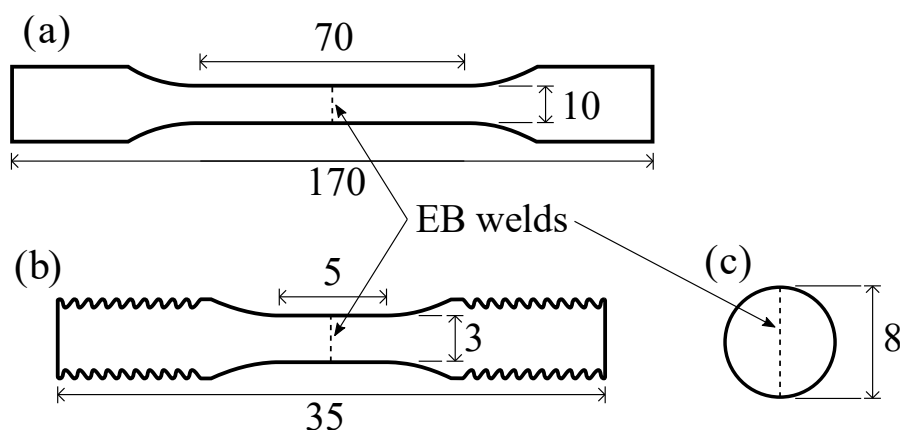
Location of the EB welds in (a) long and (b) short tensile and (c) compression specimens. The tensile specimen geometries are the same as in Figure 7.1b and c, with the addition of the location of the EB weld. (All dimensions are in mm).
